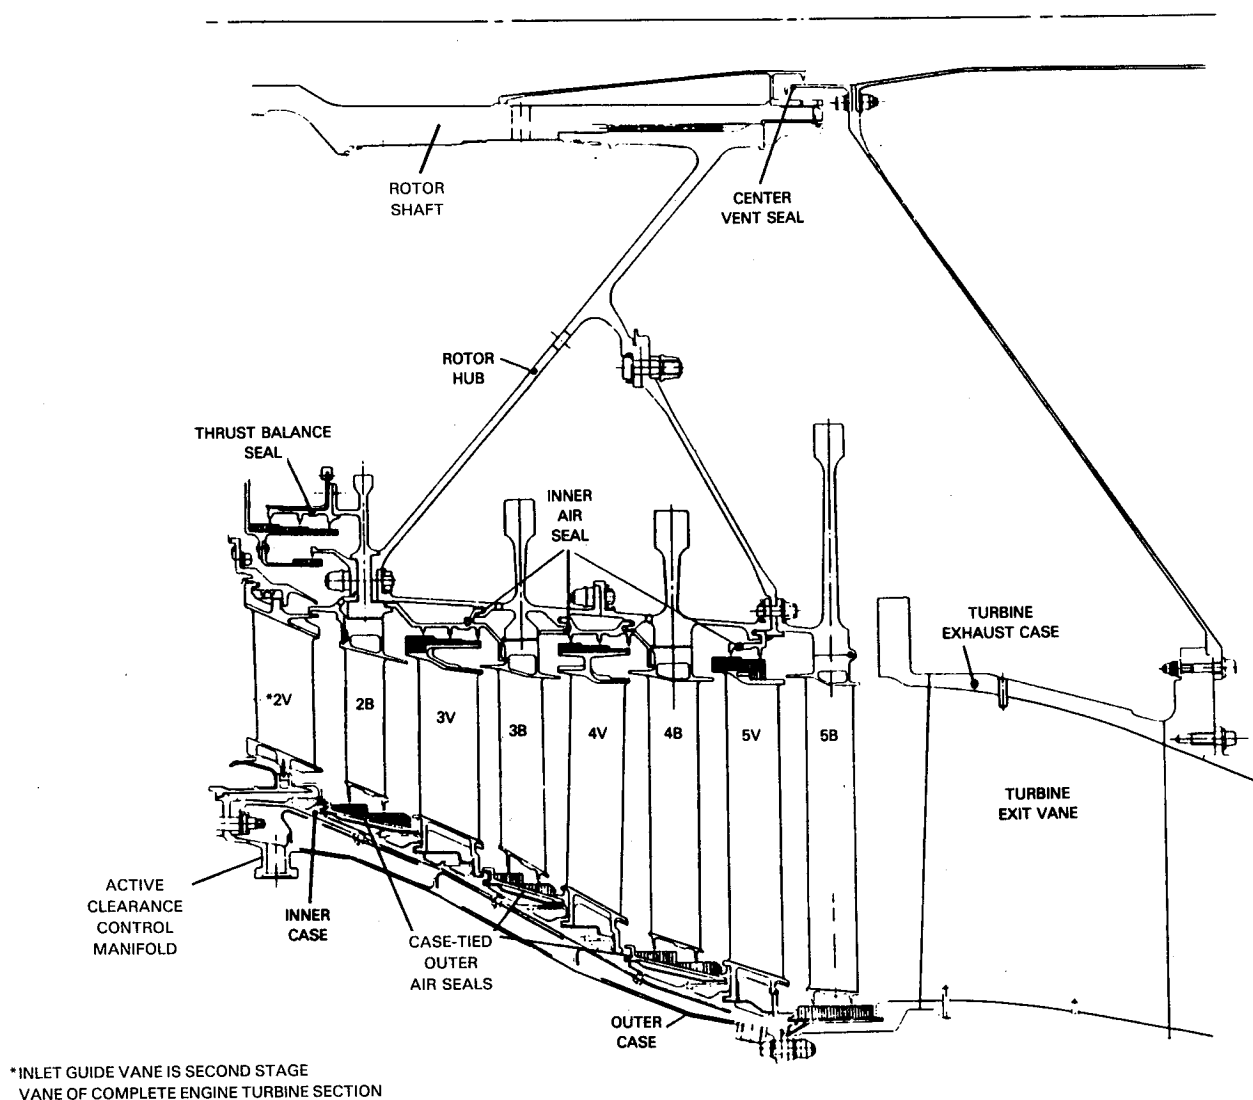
Cross-Sectional View of Low-Pressure Turbine Component with Exit Guide Vane Assembly
